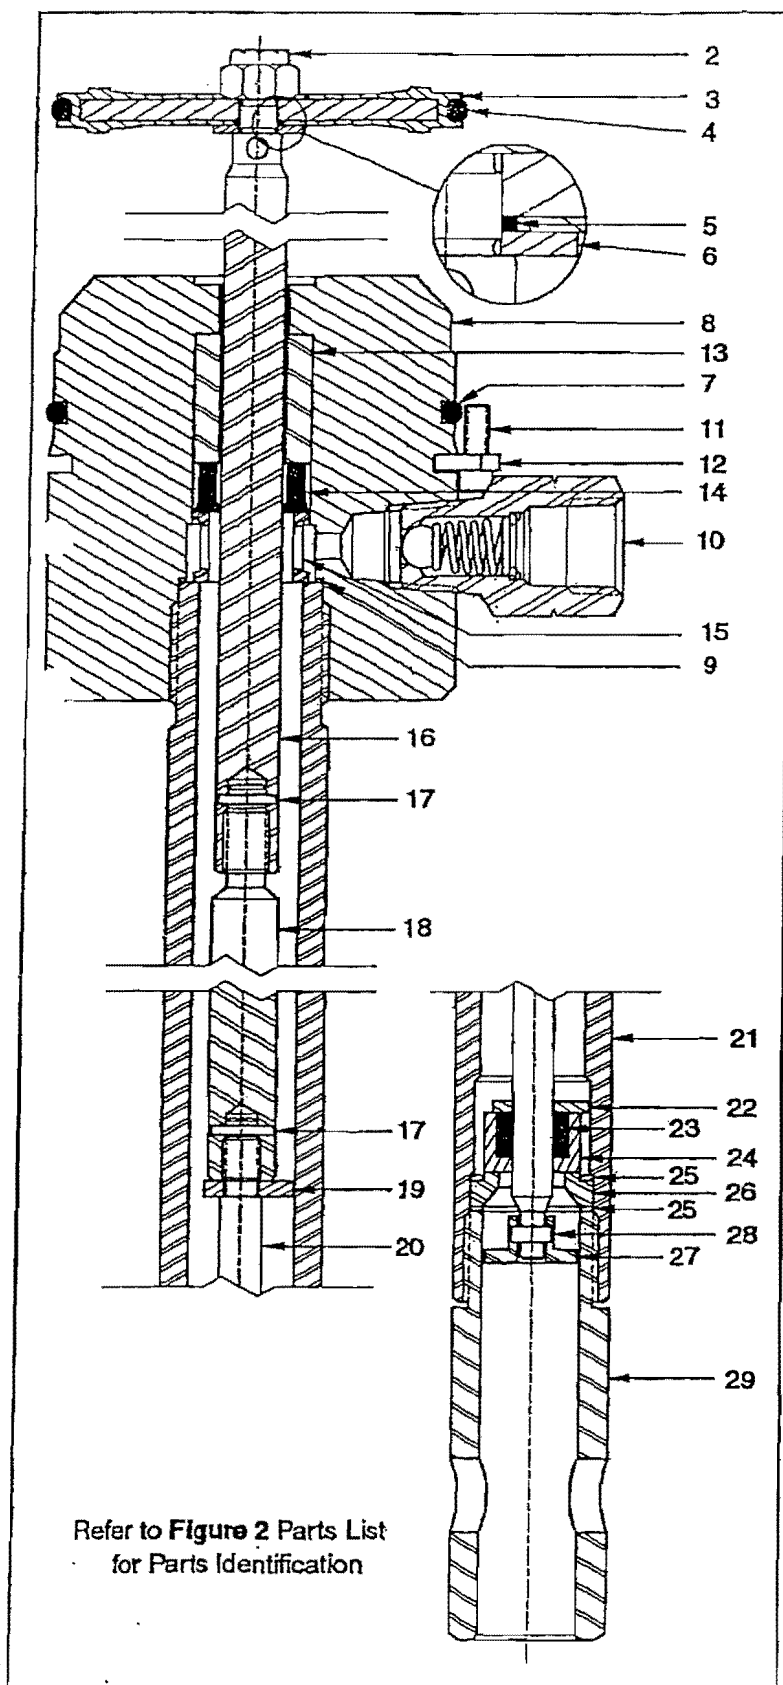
Pump Tube Assembly 338087-A1, B1, and H1
